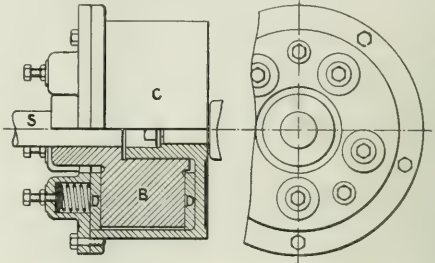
SLIP COUPLING AND BRAKE DRUM.
